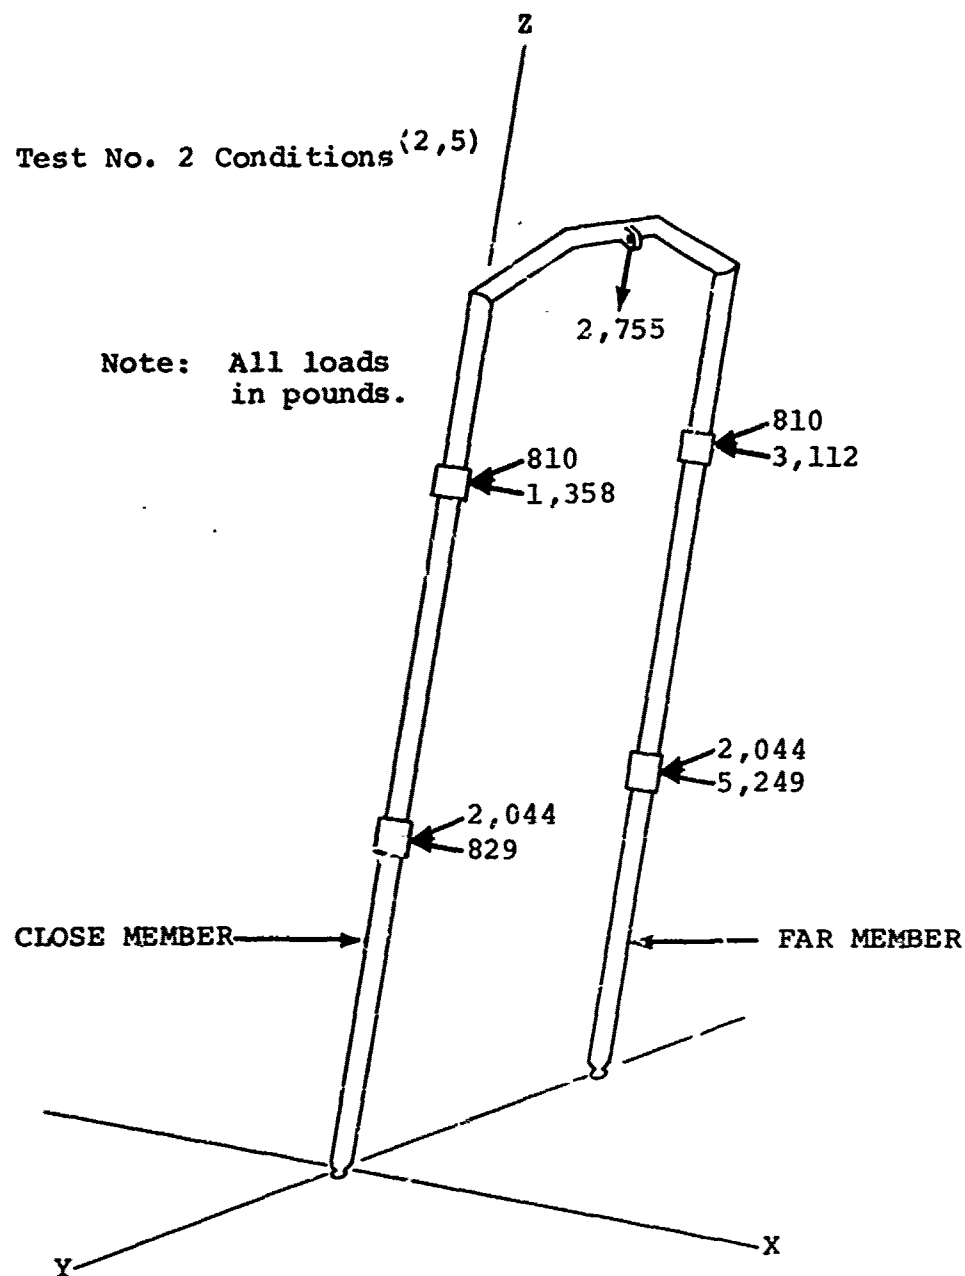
Applied Loading of Guide Frame Assembly - Biaxial Test.
